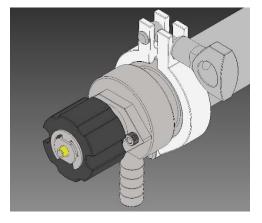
SAMPLE VALVE IN OPEN POSITION
